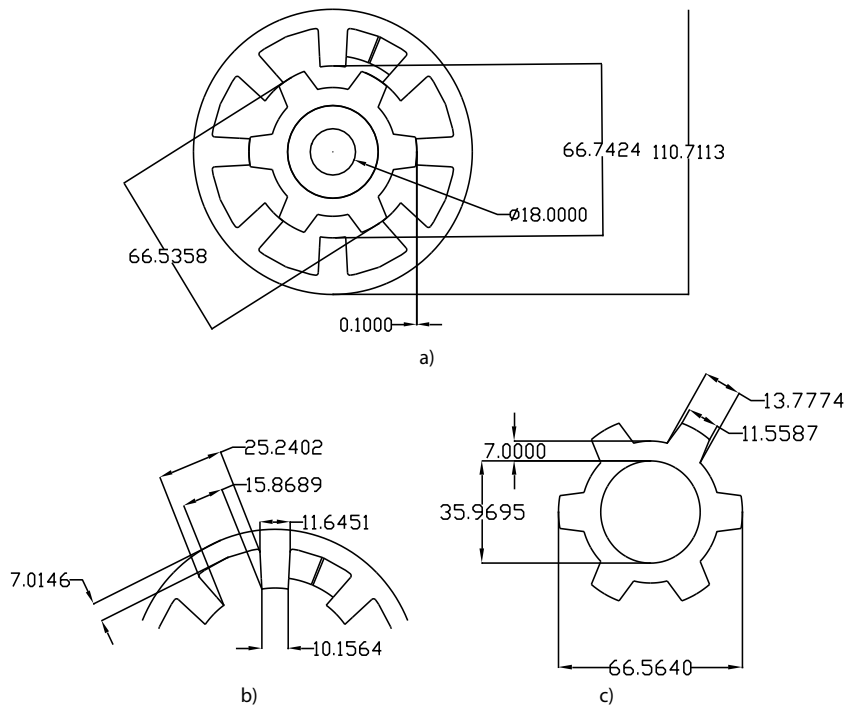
The resulted SRM dimensions: (a) the entire machine, (b) details of the stator and (c) details of the rotor.
